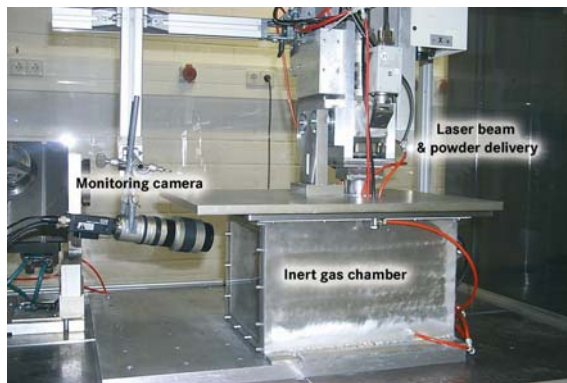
Experimental set-up for laser cladding in a sealed inert gas chamber
